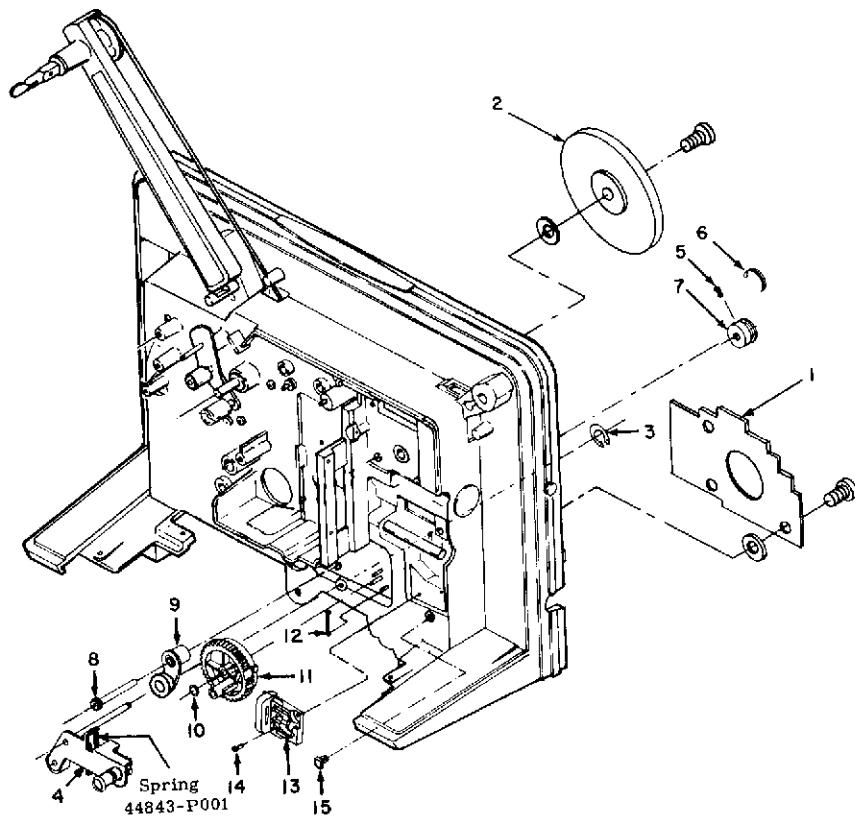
AUTOMATIC LOOP RESET REMOVAL AND REASSEMBLY
